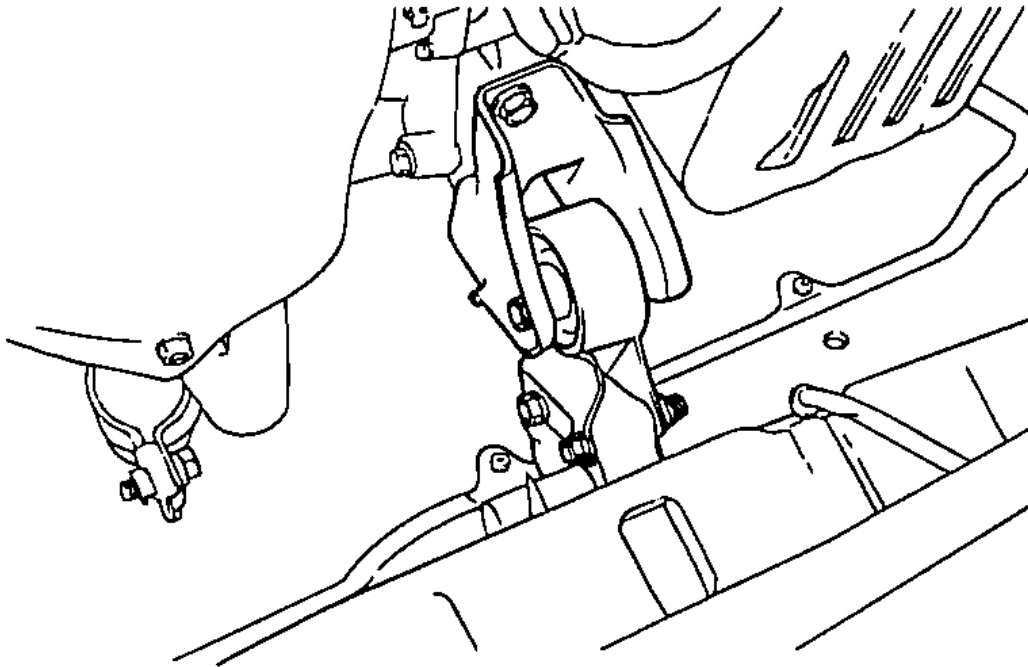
Removing Engine, Transaxle, Steering Box & Drive Shaft
